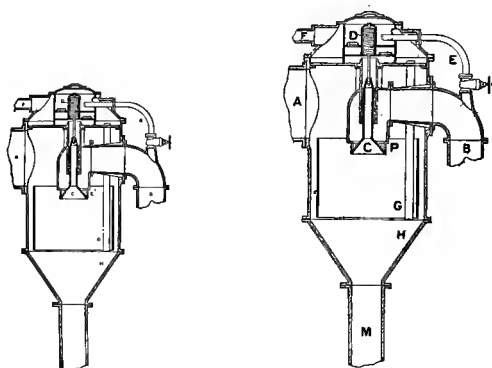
Sectional View of Alberger Barometric Condenser.
